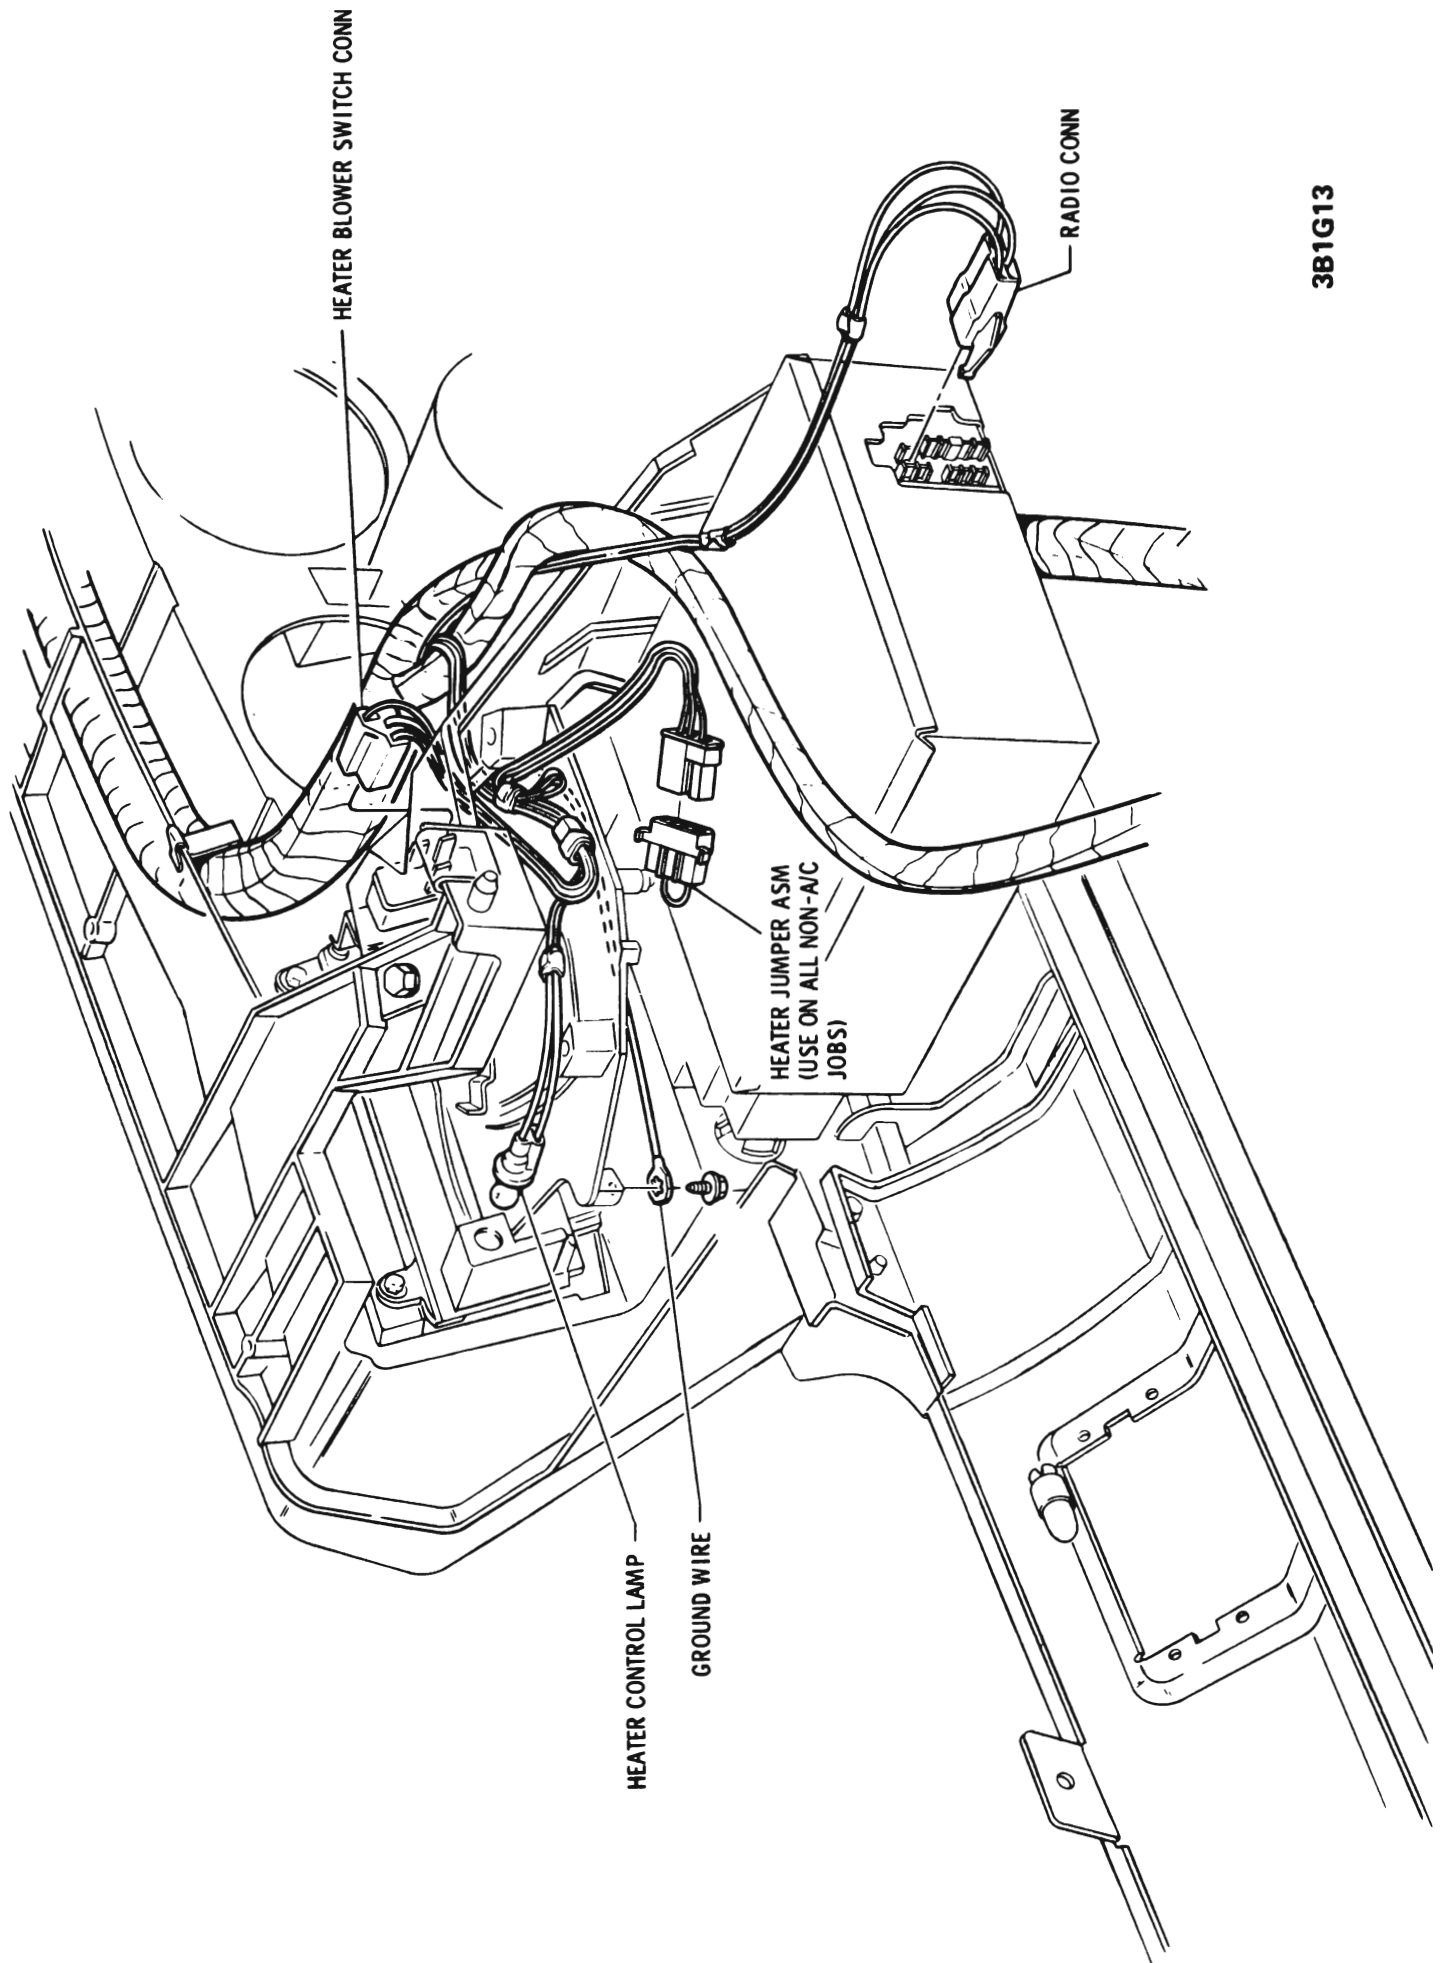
G-13 "A" Series Wiring Right Side of Instrument Panel
